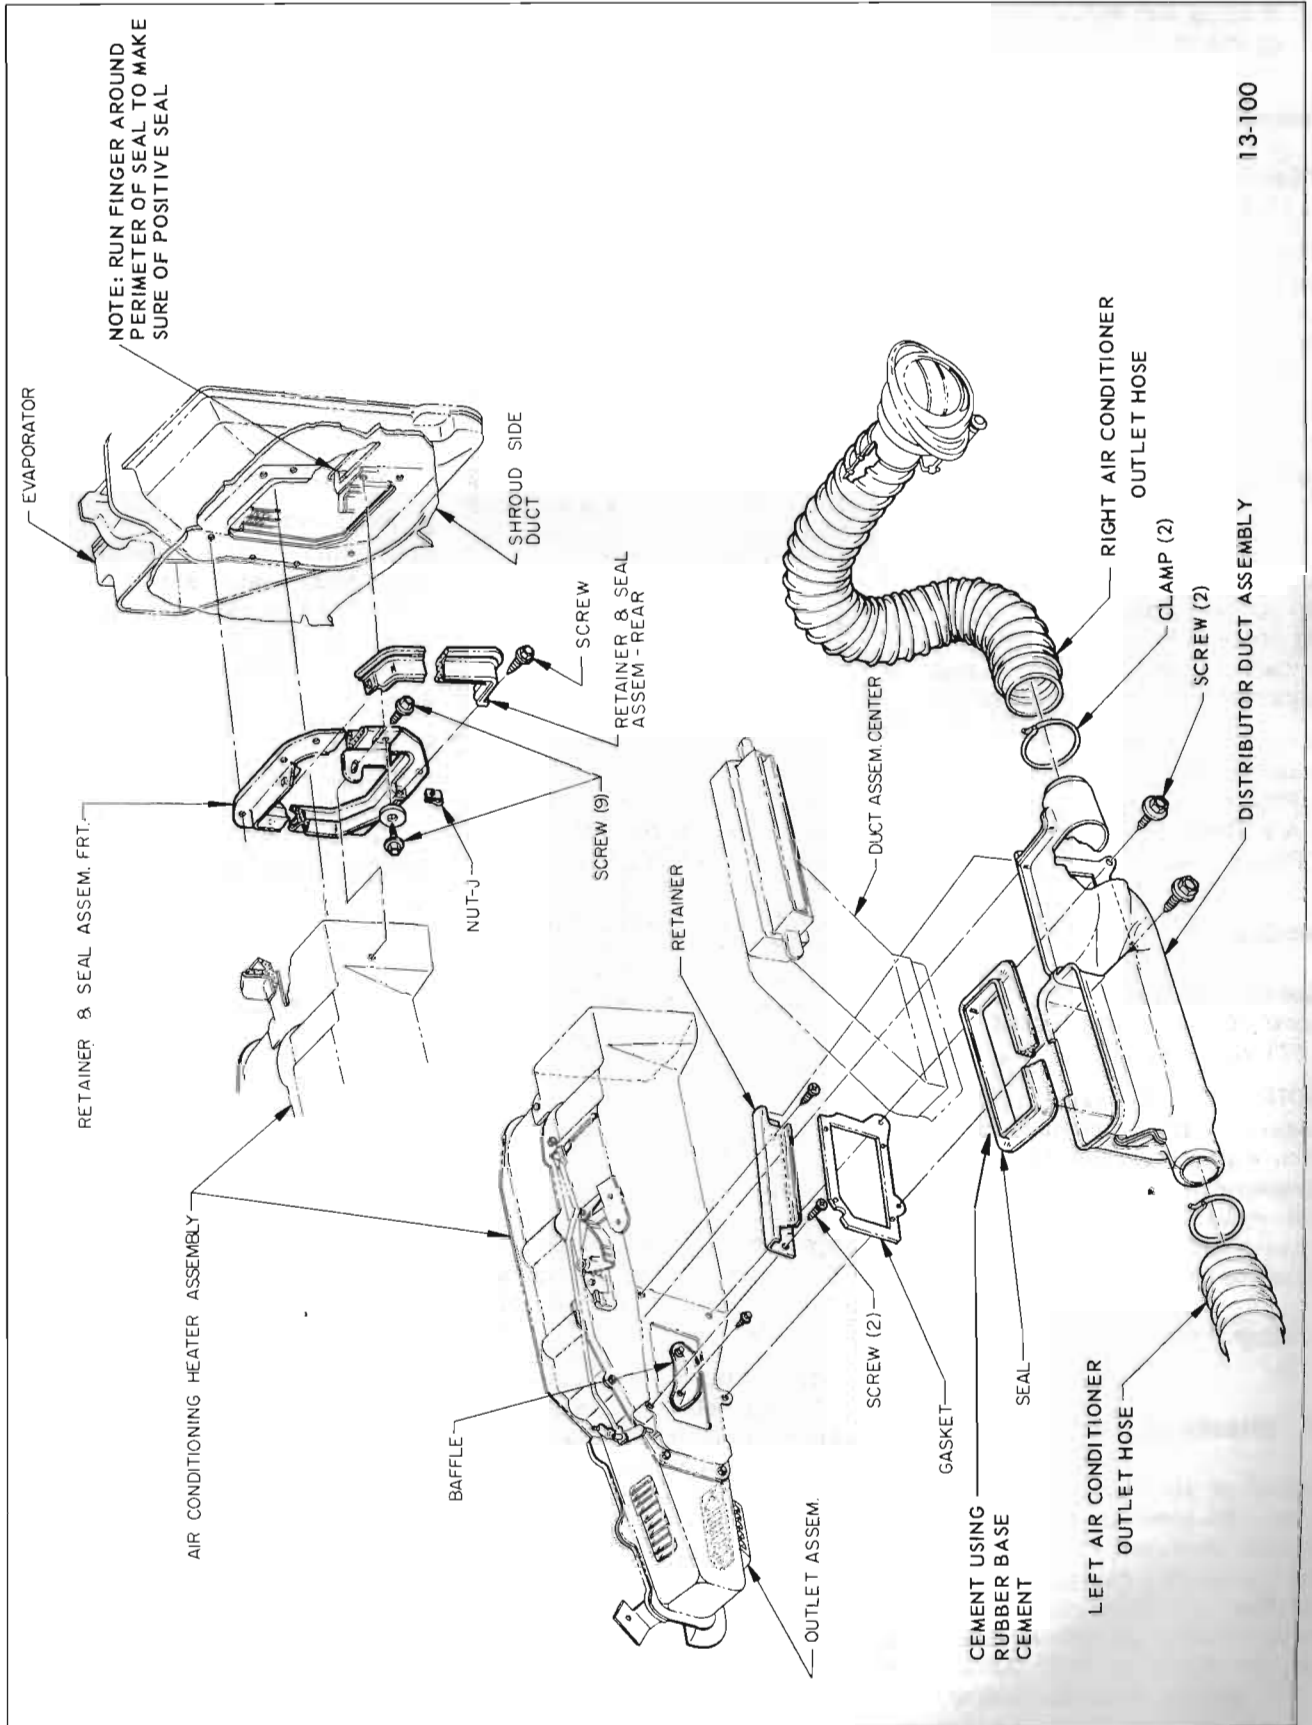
Distributor Duct Assembly, and Front Retainer and Seal Installation
